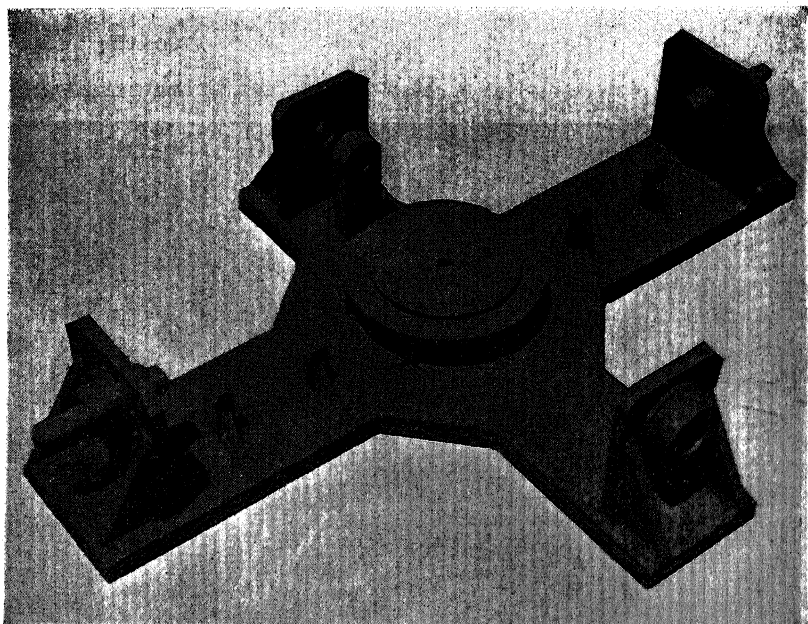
Welded steel drill jig for front axle of road-building machine. Weighs 792 lbs. (950 lbs. cast), cost \$73.98 (\$102.43 cast), built in 36 hrs. (43 hrs. cast).
